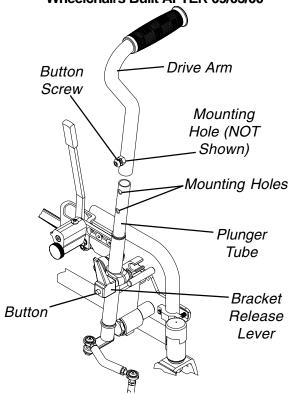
INSTALLING/REMOVING DRIVE ARM
